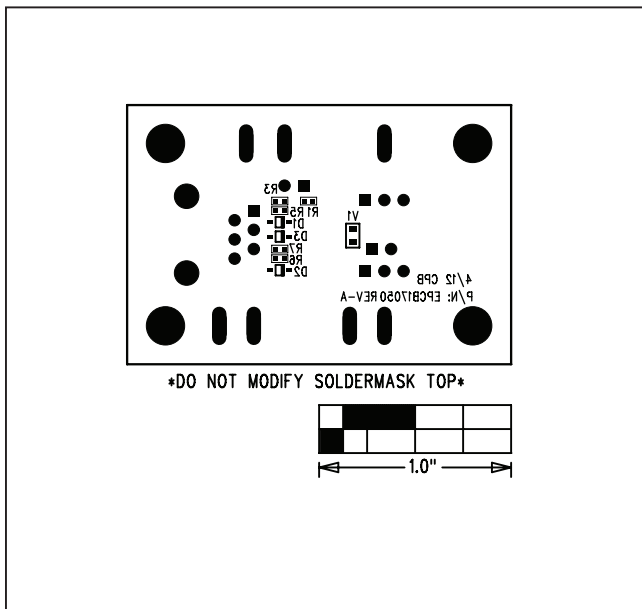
MAX17050 EV Kit PCB Layout—Component Side
